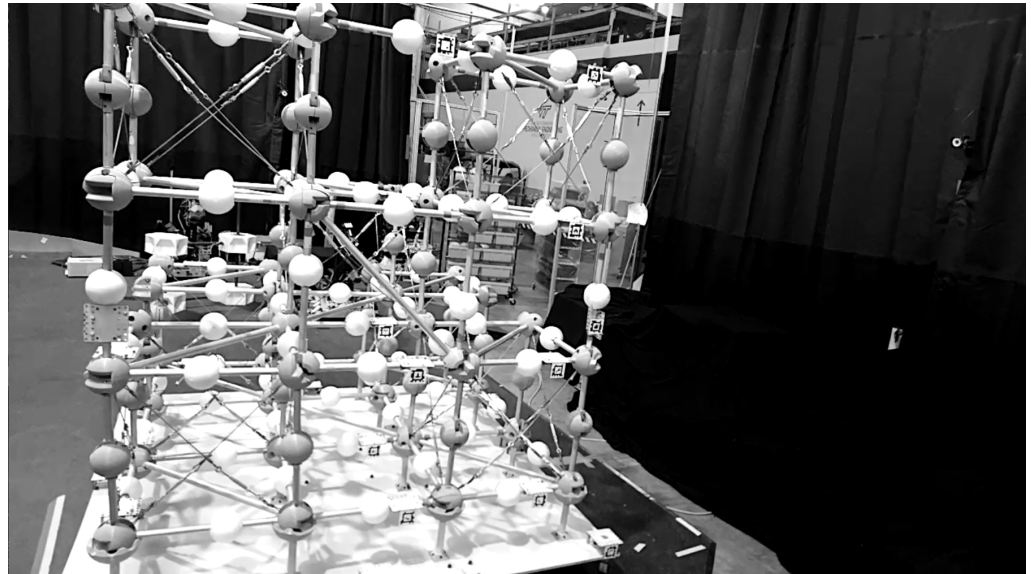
Camera view of inspection test; the first vertical close-out-square of layer 2 is assembled, connecting the first two-layer 3 deployables.
